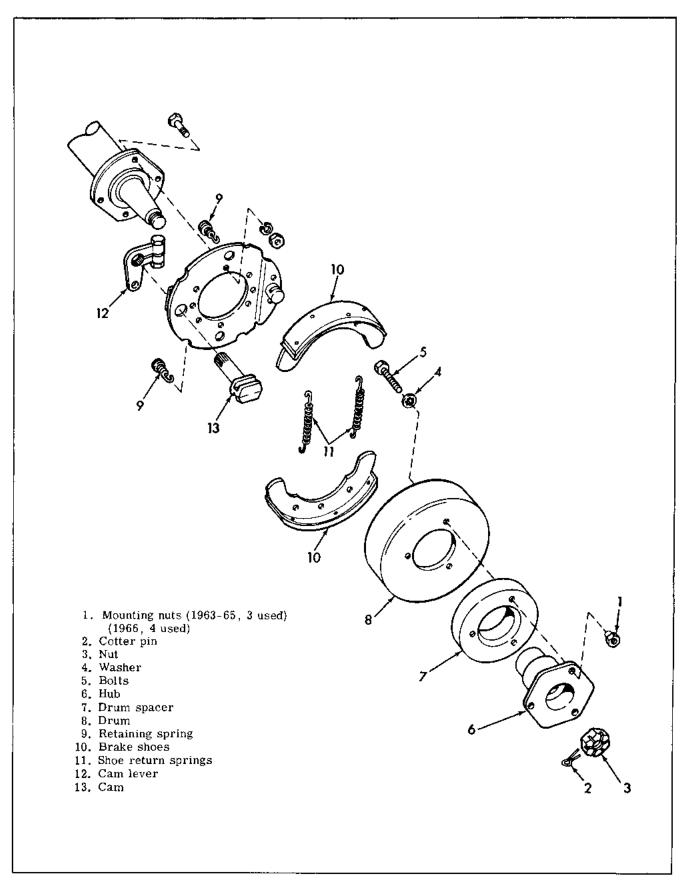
G-38. Mechanical Drum Type Brake - Exploded View
